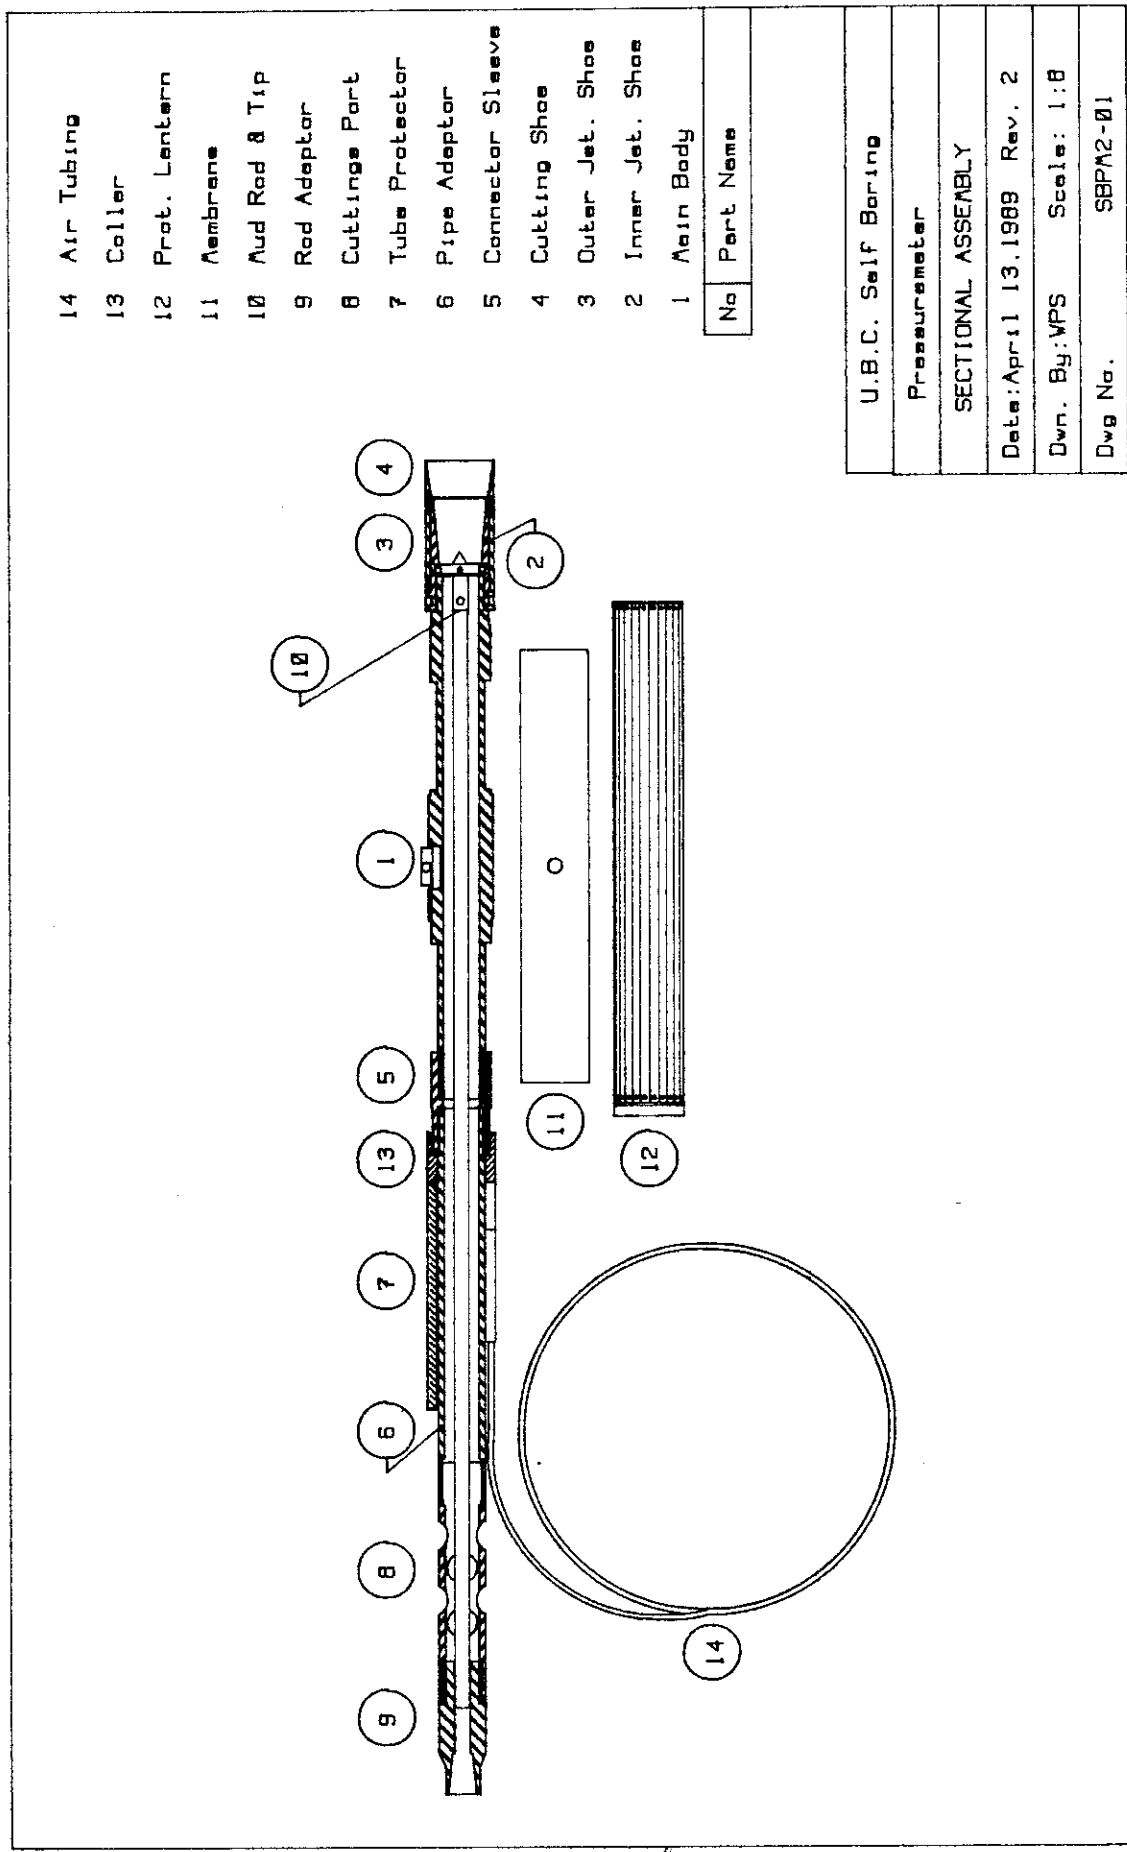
Sectional assembly of UBC self-boring pressuremeter
